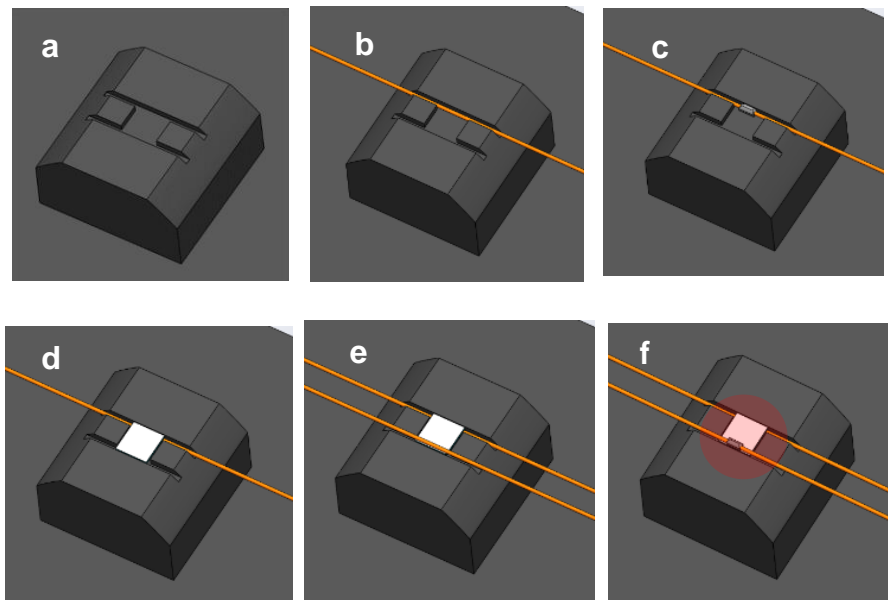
Soldering process for solar cells (SCs). (a) The bespoke mould design. (b) The Cu wire positioned on the mould. (c) Solder paste was dispensed onto the first Cu wire. (d) The SC was positioned on the mould with the front contact touching the first Cu wire. (e) The second Cu wire was positioned on the mould and back side of the SC. (f) Solder paste was dispensed onto the second Cu wire and IR beam was applied.
